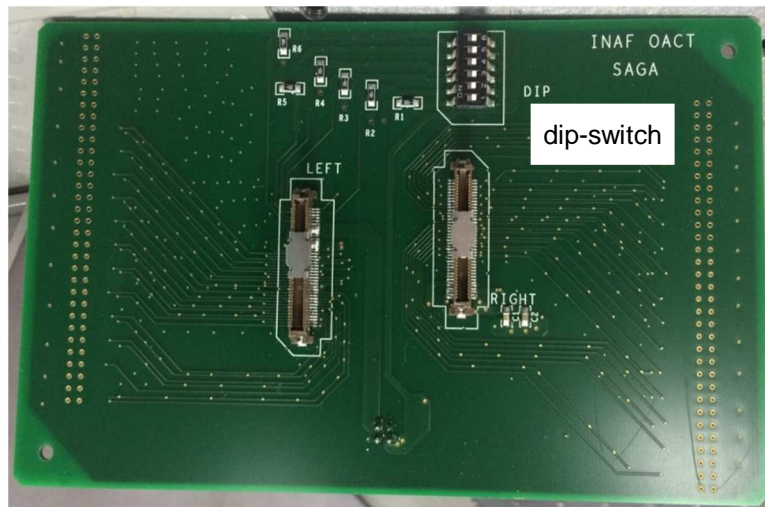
Top side of the adapter board. On the upper central part the dip-switch is evident.
